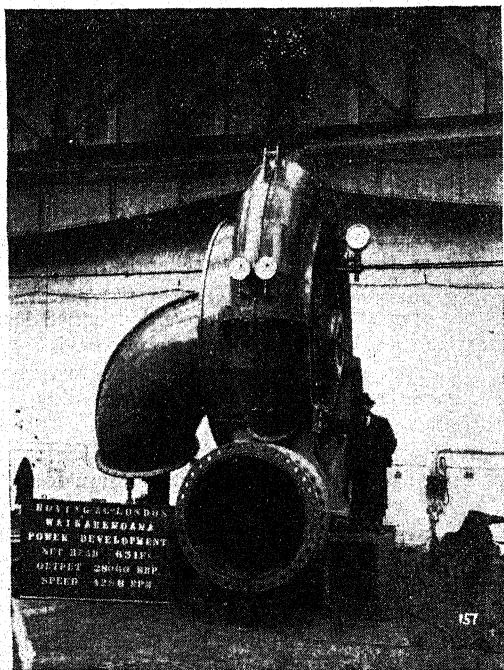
Horizontal Francis type turbine with arc welded spiral casing. Photo courtesy Boving & Co., Ltd.
